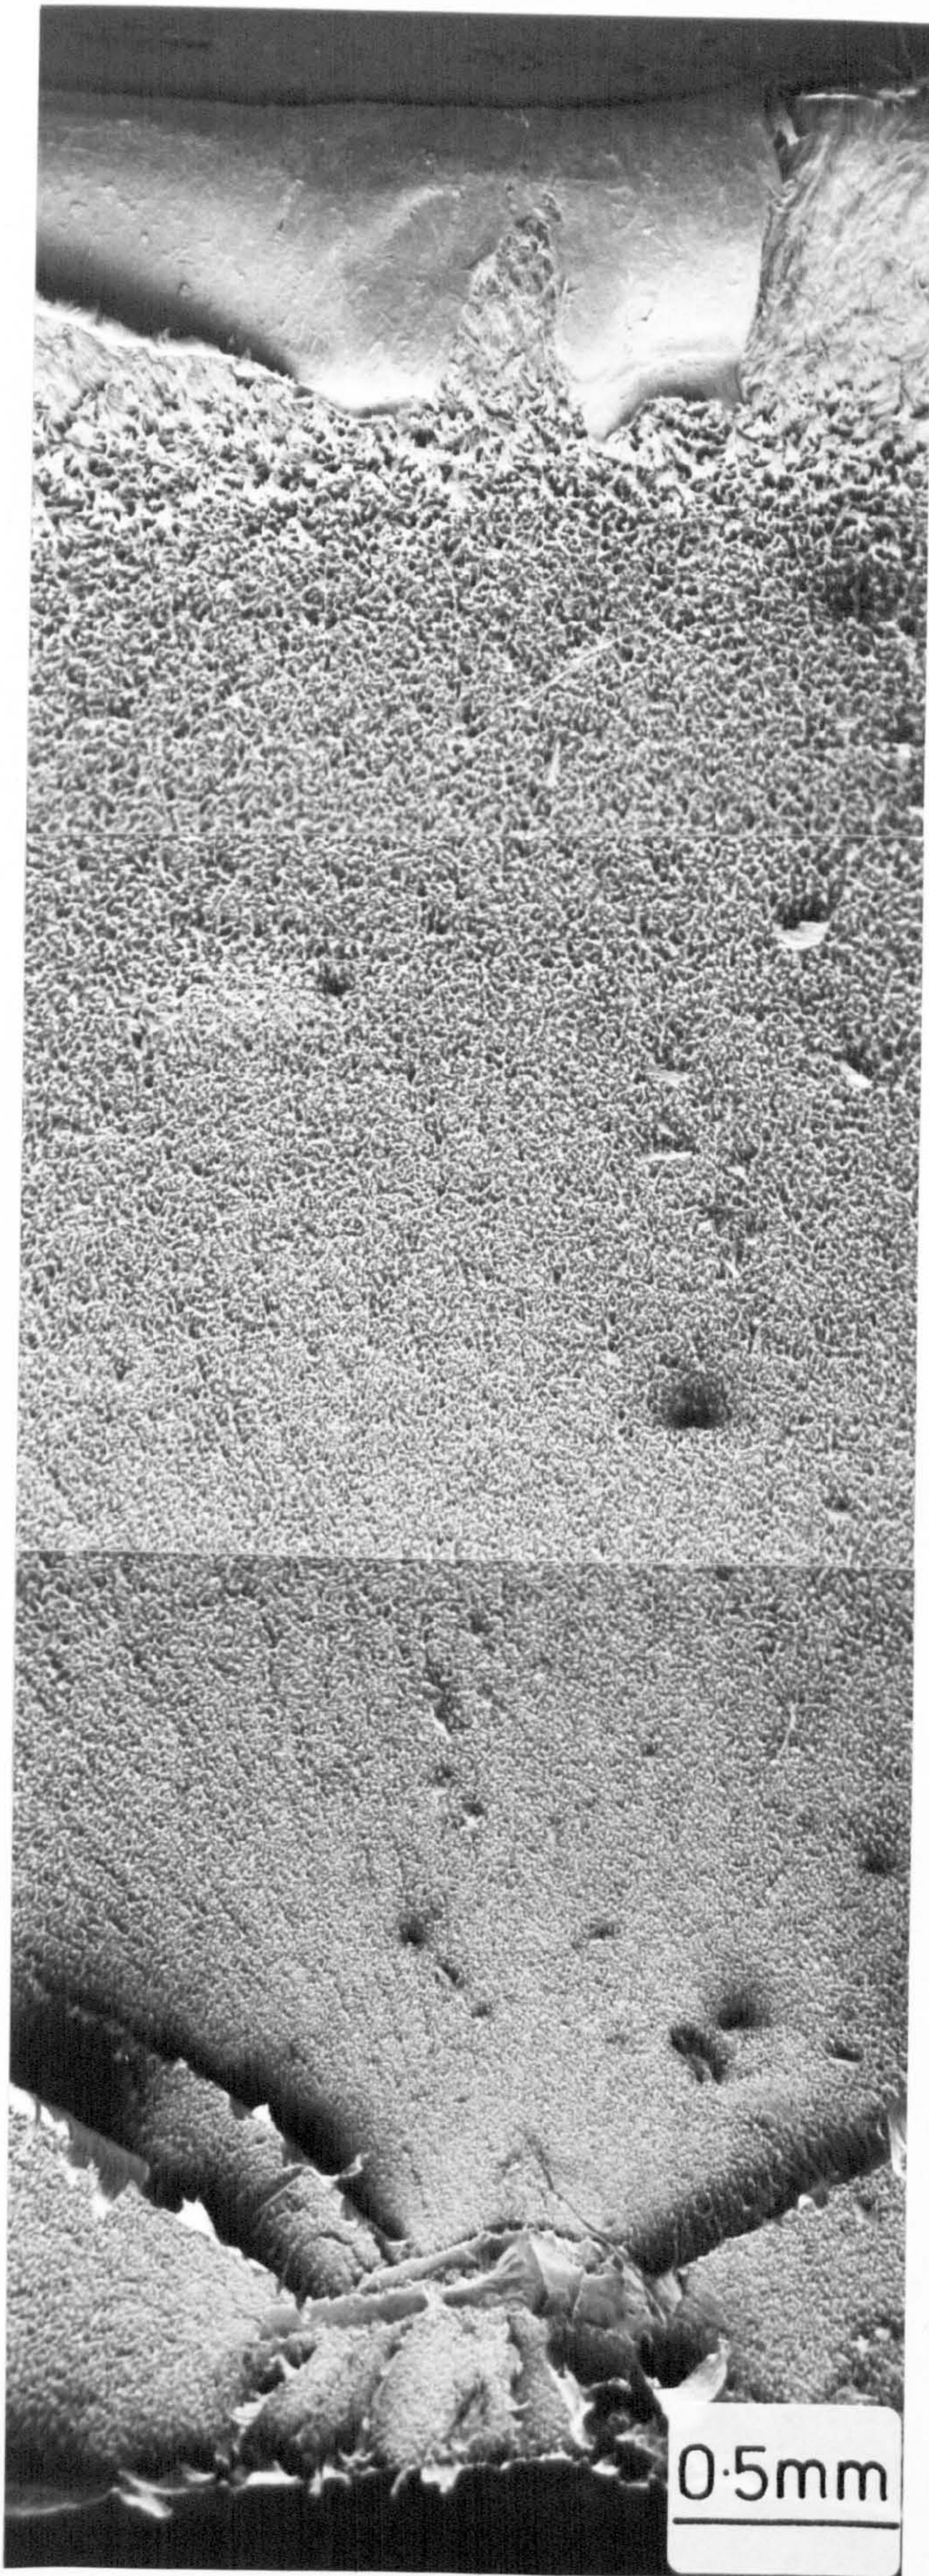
Fracture surface of a circumferential butt-weld failure (P/P Type 2) in an HDPE 1 pipe system.
